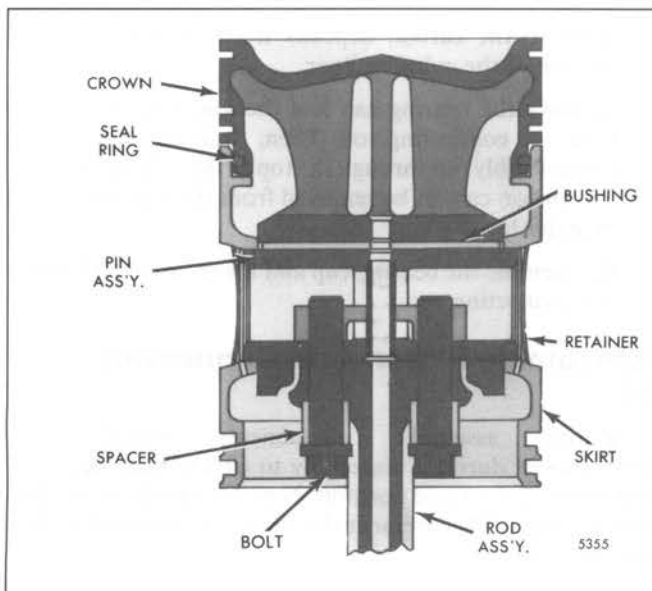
Cross-Head Piston and Connecting Rod Assembly
